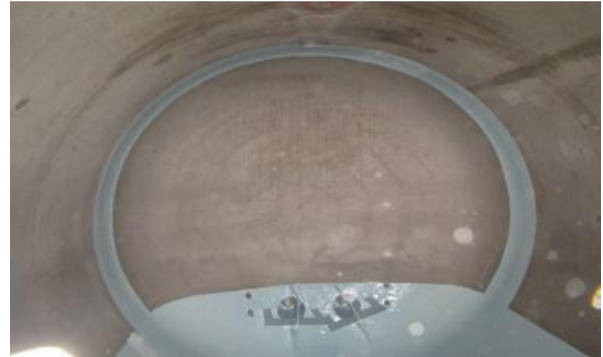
View of Coating Application on the circumferential weld of dome side [5].
